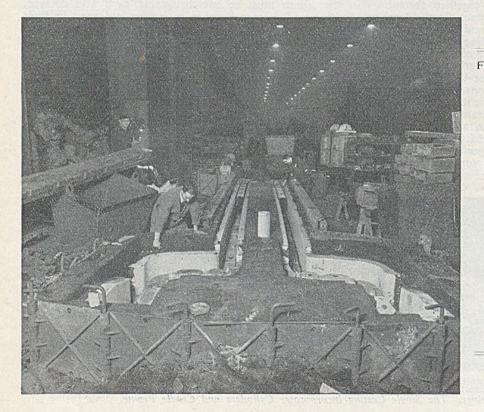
Method of Moulding the Sidemembers for a Lowslung Railway Wagon which were Cast in Pairs. Moulding Boxes with Collapsible Crib Plates were used to facilitate "Easing" after Casting. For this Purpose the Joint Pins shown in the lower part of the Illustration were withdrawn soon after Pouring. The Pattern Allowance for Contraction on this Job was 6.4 in., and yet the Maximum Length Error ever experienced was only  $\frac{1}{8}$  in. These Castings were made during the War for use on Southern Region Railway Wagons used in Transporting Tanks.
